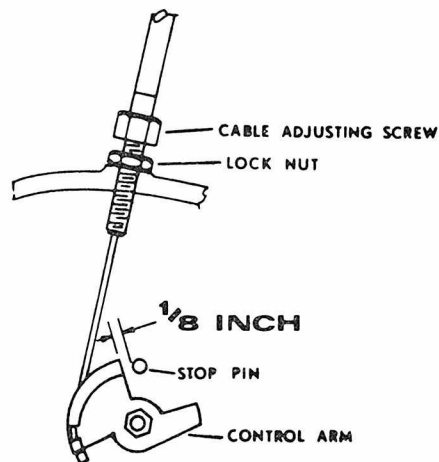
Automatic oil pump metering control arm should have  $\frac{1}{8}$  inch clearance with throttle fully open.
